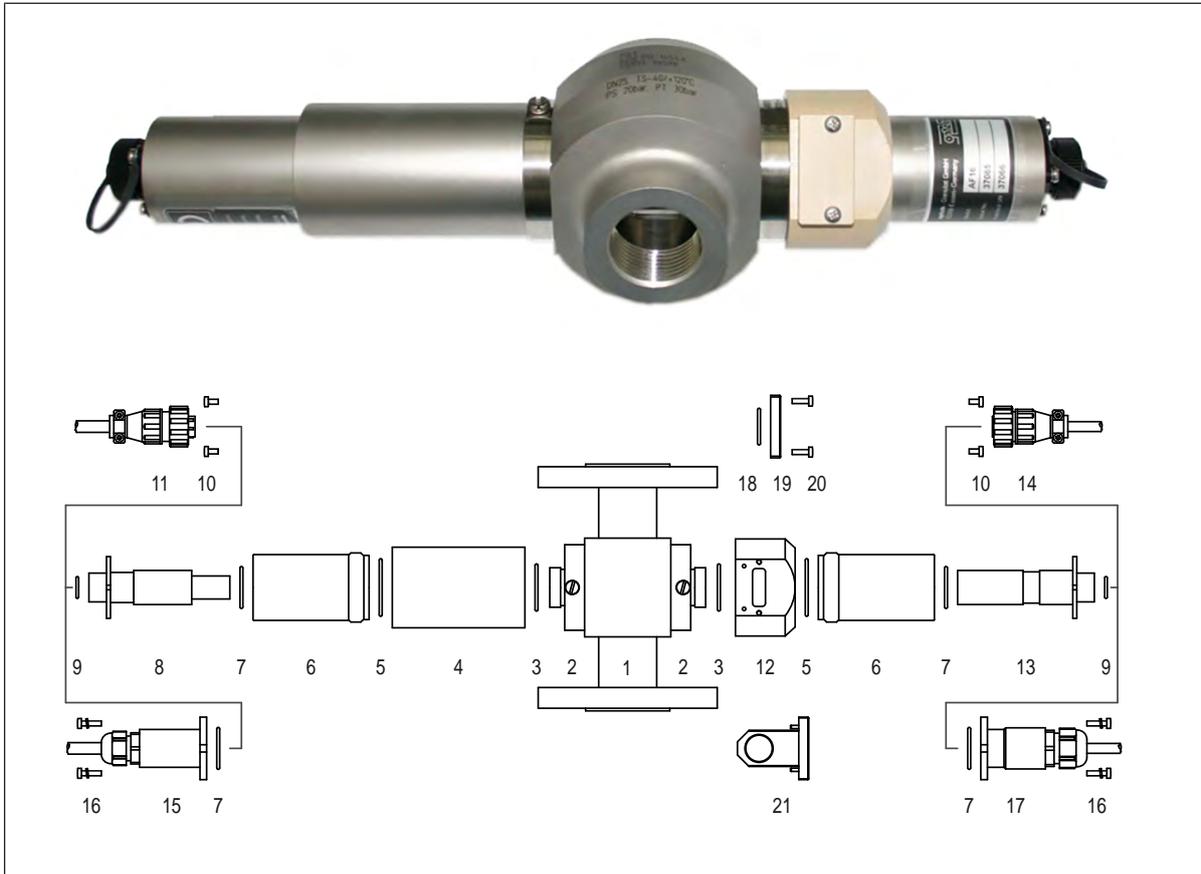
Photo and exploded view AF16-VB-F / AF16-VB-N / AF16-VB-P
